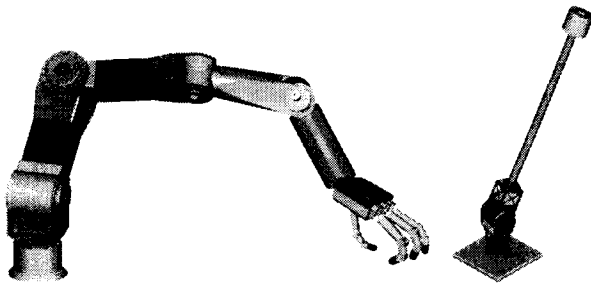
The CAD model of DLR's new 7-dof light weight robot arm (left) and the testbed setup of joint 2 (right)
